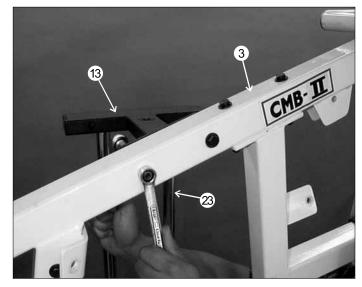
Maneuver each of the Guide Rods (#23) into the holes on the bottom side of the Guide Rod Retainer (#13). Next, mount the Guide Rod Retainer (#13) along with the two captive Guide Rods (#23) to the side of the Top Pulley Assembly (#3) and secure using two Hex Head Cap Screws 3/8-16 X 2 3/4 (#55), four Flat Washers SAE 3/8 (#73) and two Nylon Insert Jam Lock Nuts 3/8-16 (#69).
